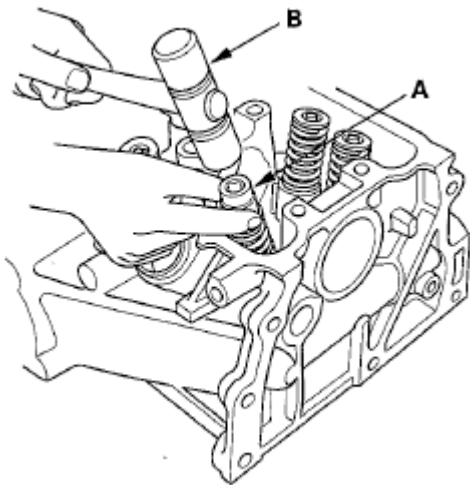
Tapping Spring Retainer To Loosening Valve Cotters Using Socket & Plastic Mallet
